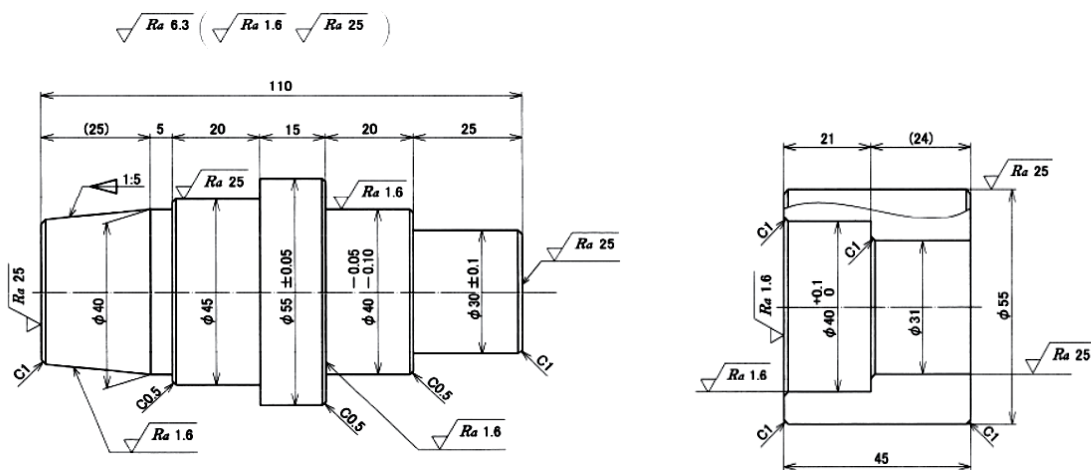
Manufacturing drawing of the 3rd grade skill proficiency test of Lathe.
